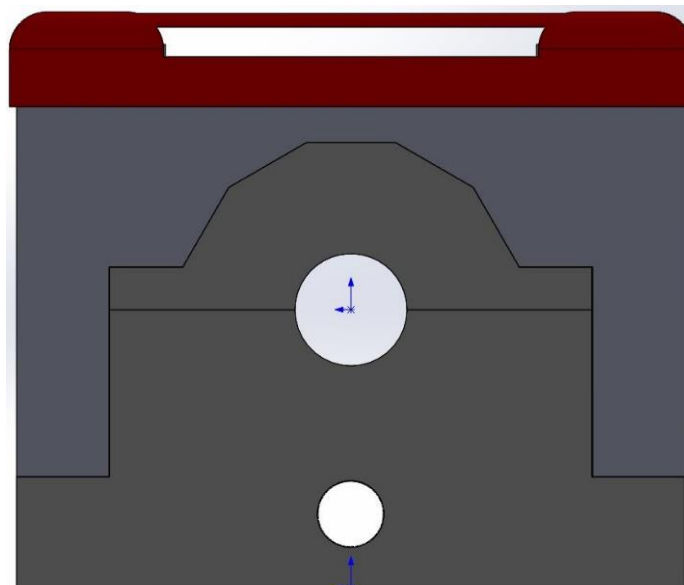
FBG SUPPORT ASSEMBLED ON THE BEARING SUPPORT
